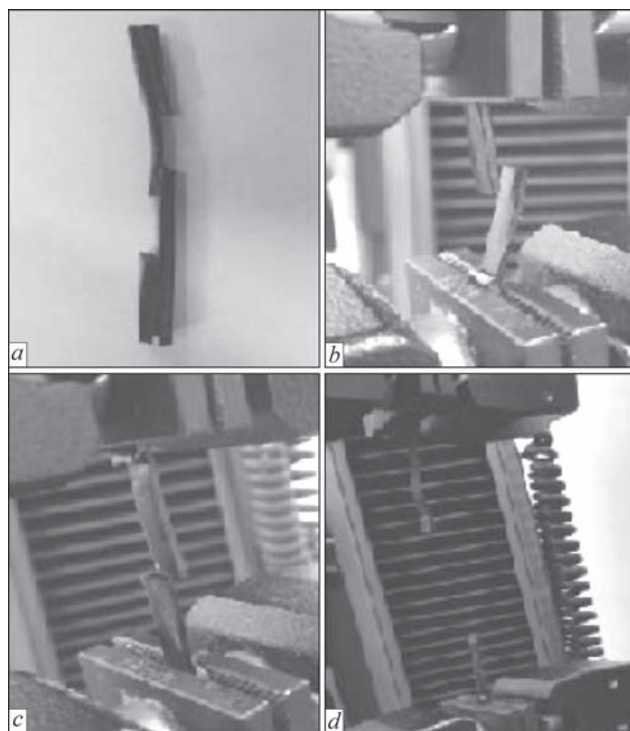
The sample of the lap-shear test (a). The photographs of the lap-shear test from the samples with different weld times: 2 min (b), 5 min (c), and 20 min (d) [12].
